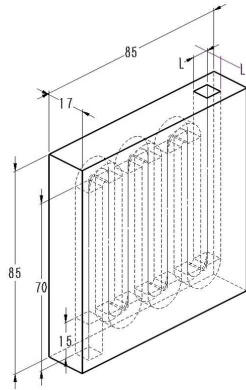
Dimensions of the heat sink with S-shaped cooling channel design.
